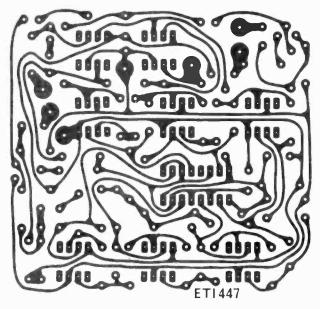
Printed-Circuit Layout. Full Size 81 x 76 .mm.
